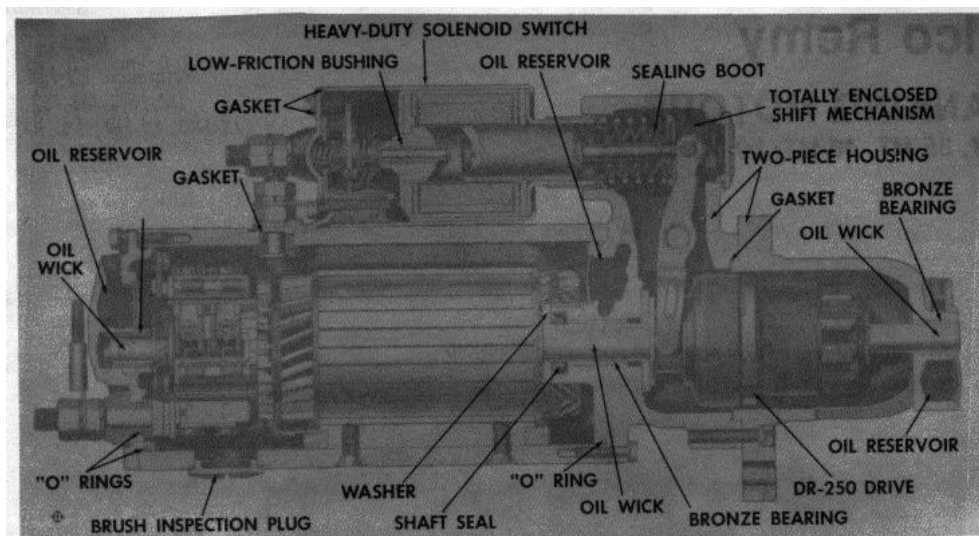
Cross-sectional view of motor with DR-250 heavy duty drive (50-MT)
